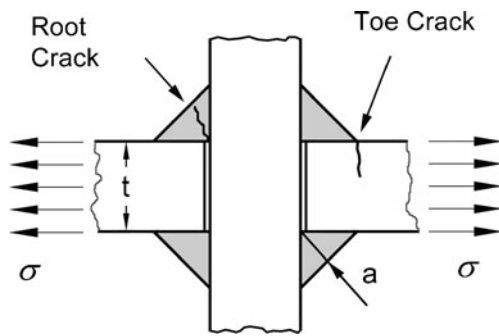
Possible crack locations in a cruciform joint with load-carrying fillet welds
